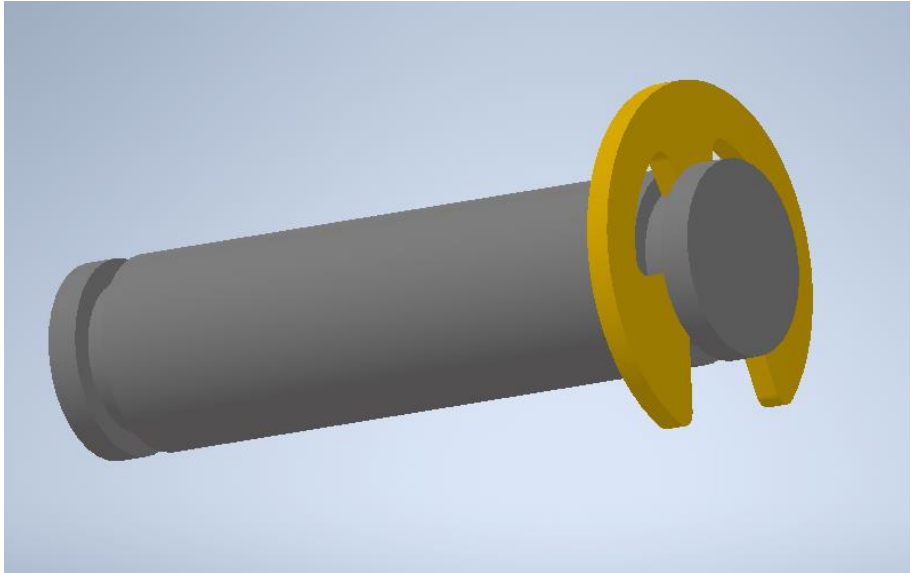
A dowel pin axle with retainer ring mounted on one end
